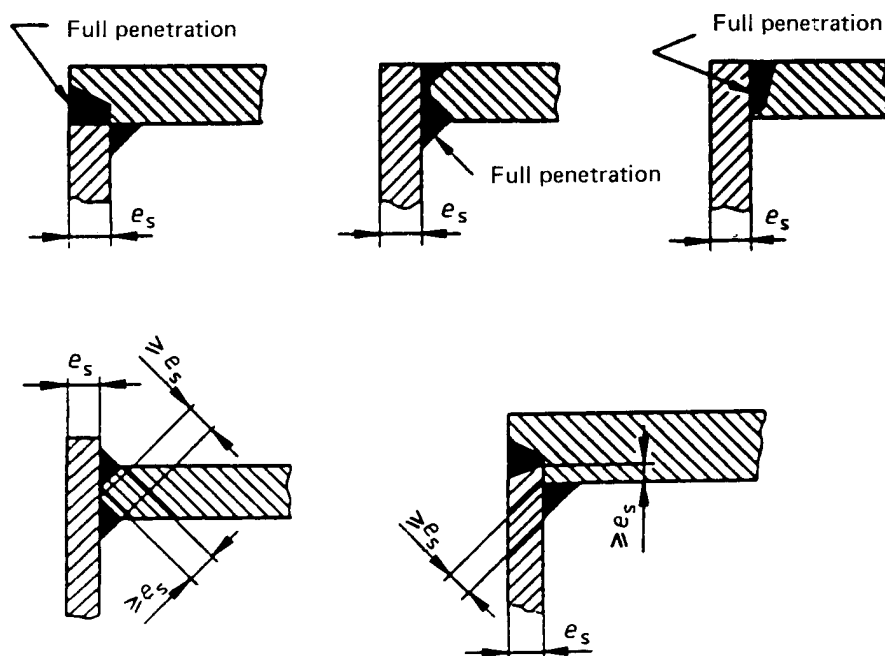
Allowed types of weld joint design (flat ends/shells)
